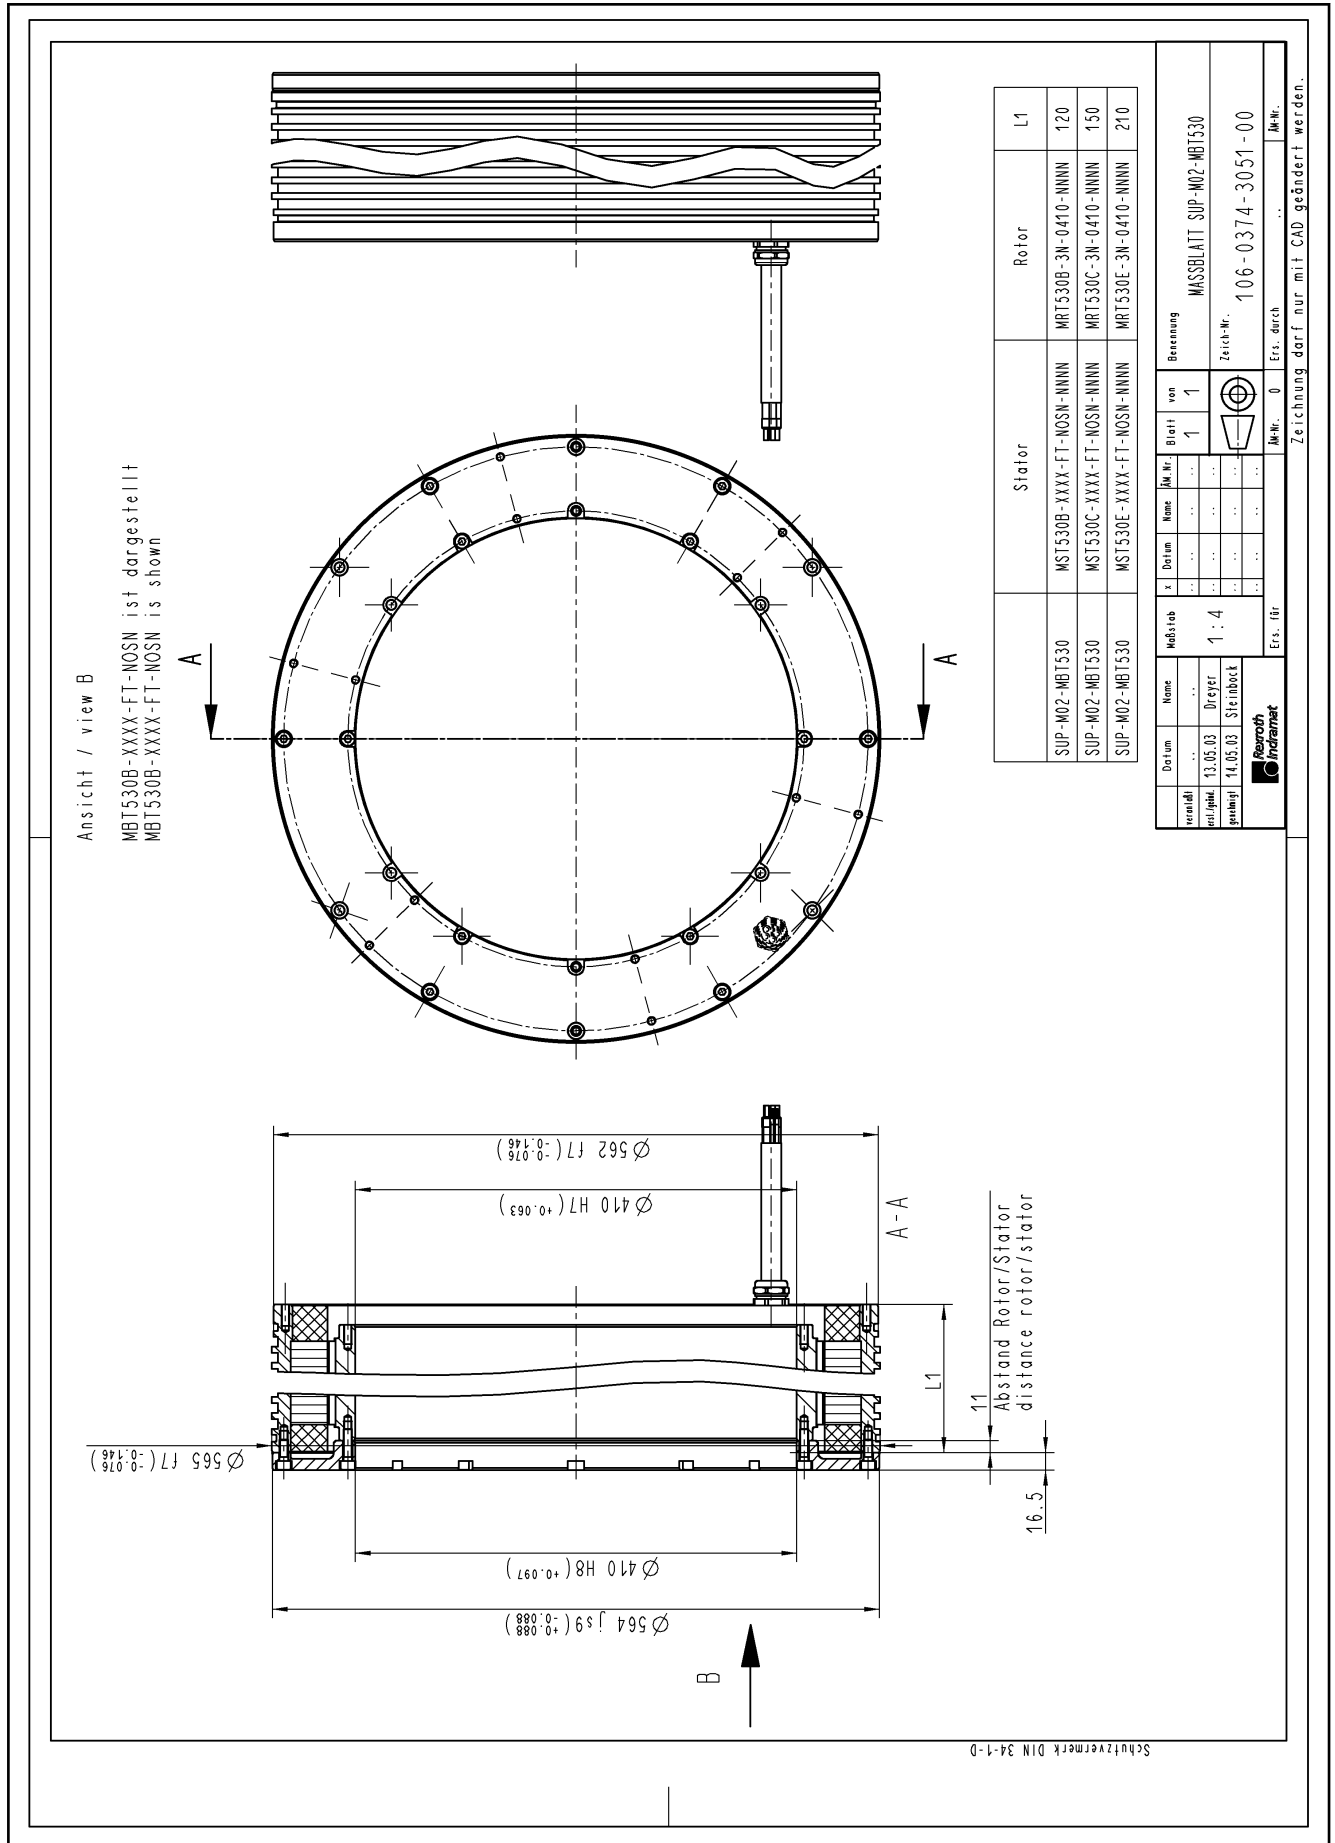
Dimension sheet of mounting ring in SUP-M02-MBT530
